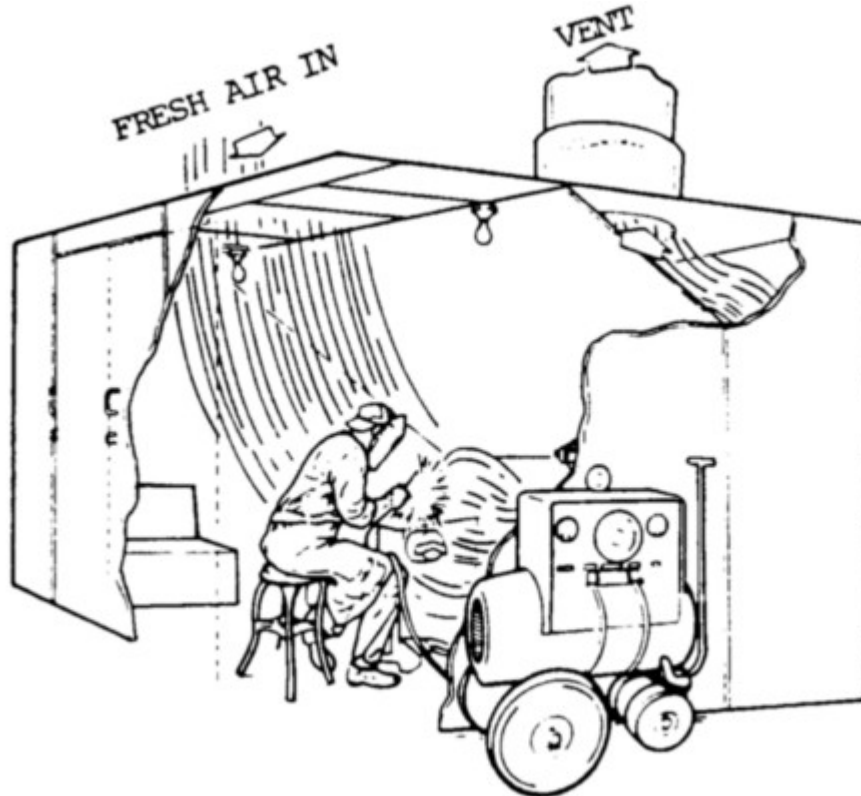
Welding booth with mechanical ventilation.
